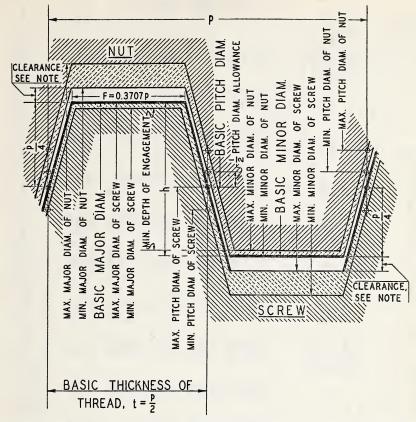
Illustration of allowances, tolerances, and crest clearances, Acme threads.
